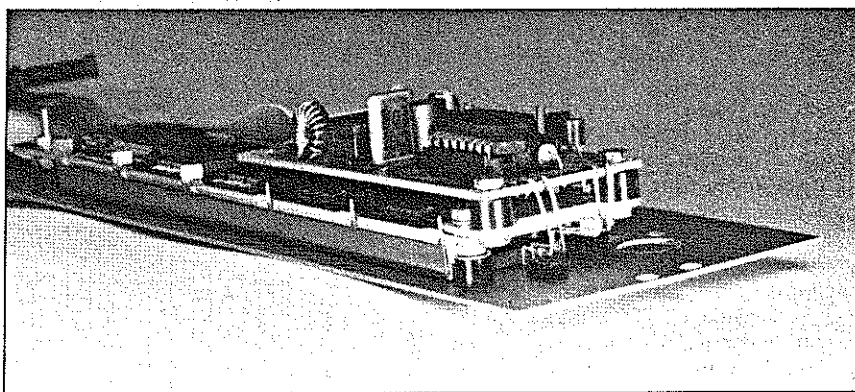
Suggested mounting of the infra-red receiver on a small piece of aluminium secured to the rear of the LCD unit. The LED and photodiode connections need to be extended in this case to enable the opto components to be fitted on the front panel.
